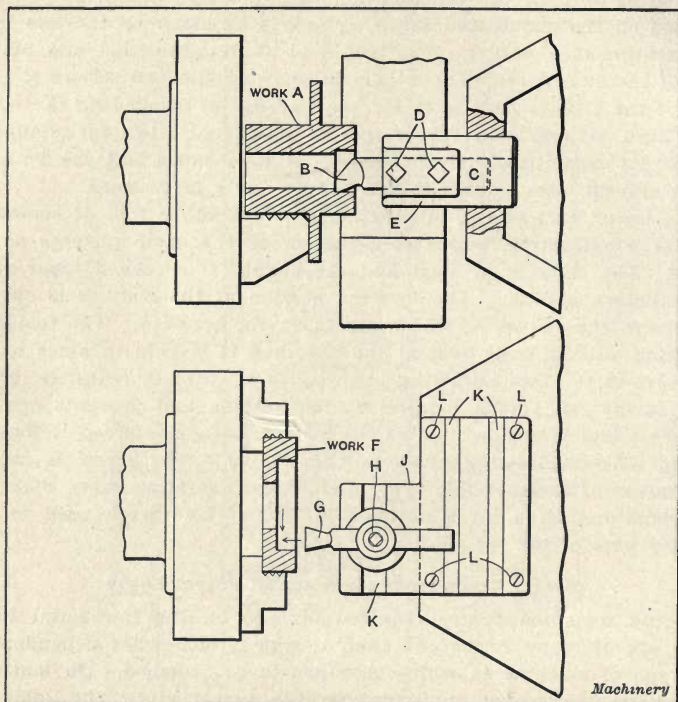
(Upper View) Single-point Starting Tool; (Lower View) Boring and Facing Tool
